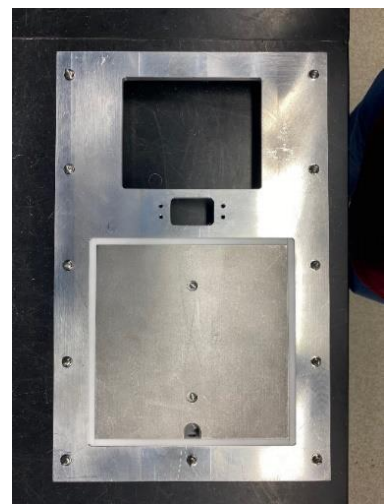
Front view of the Mpactor with front panel removed showing compaction chamber
